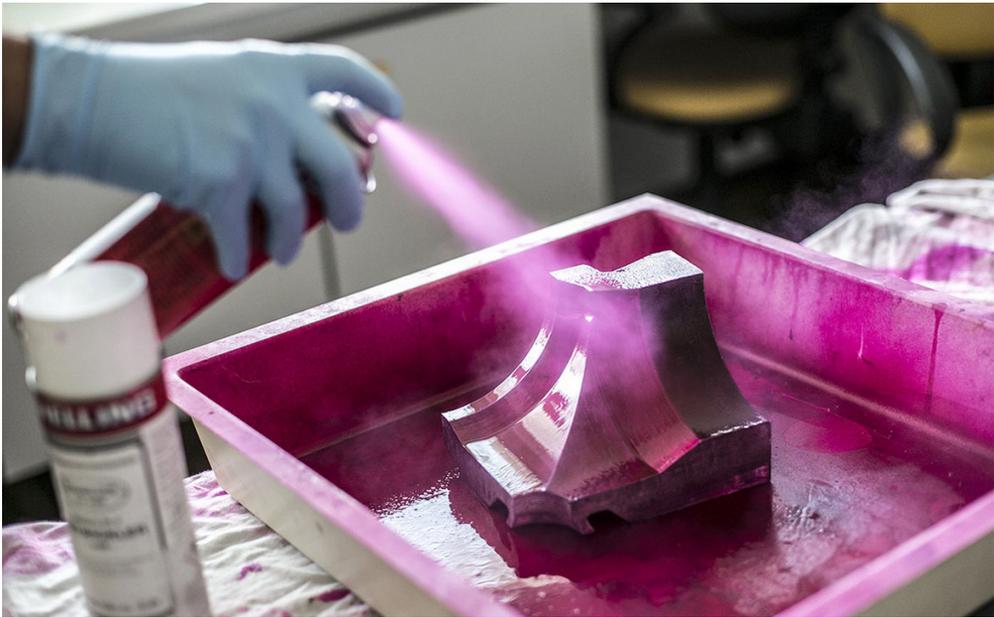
Liquid penetrant testing inspection method [10]
